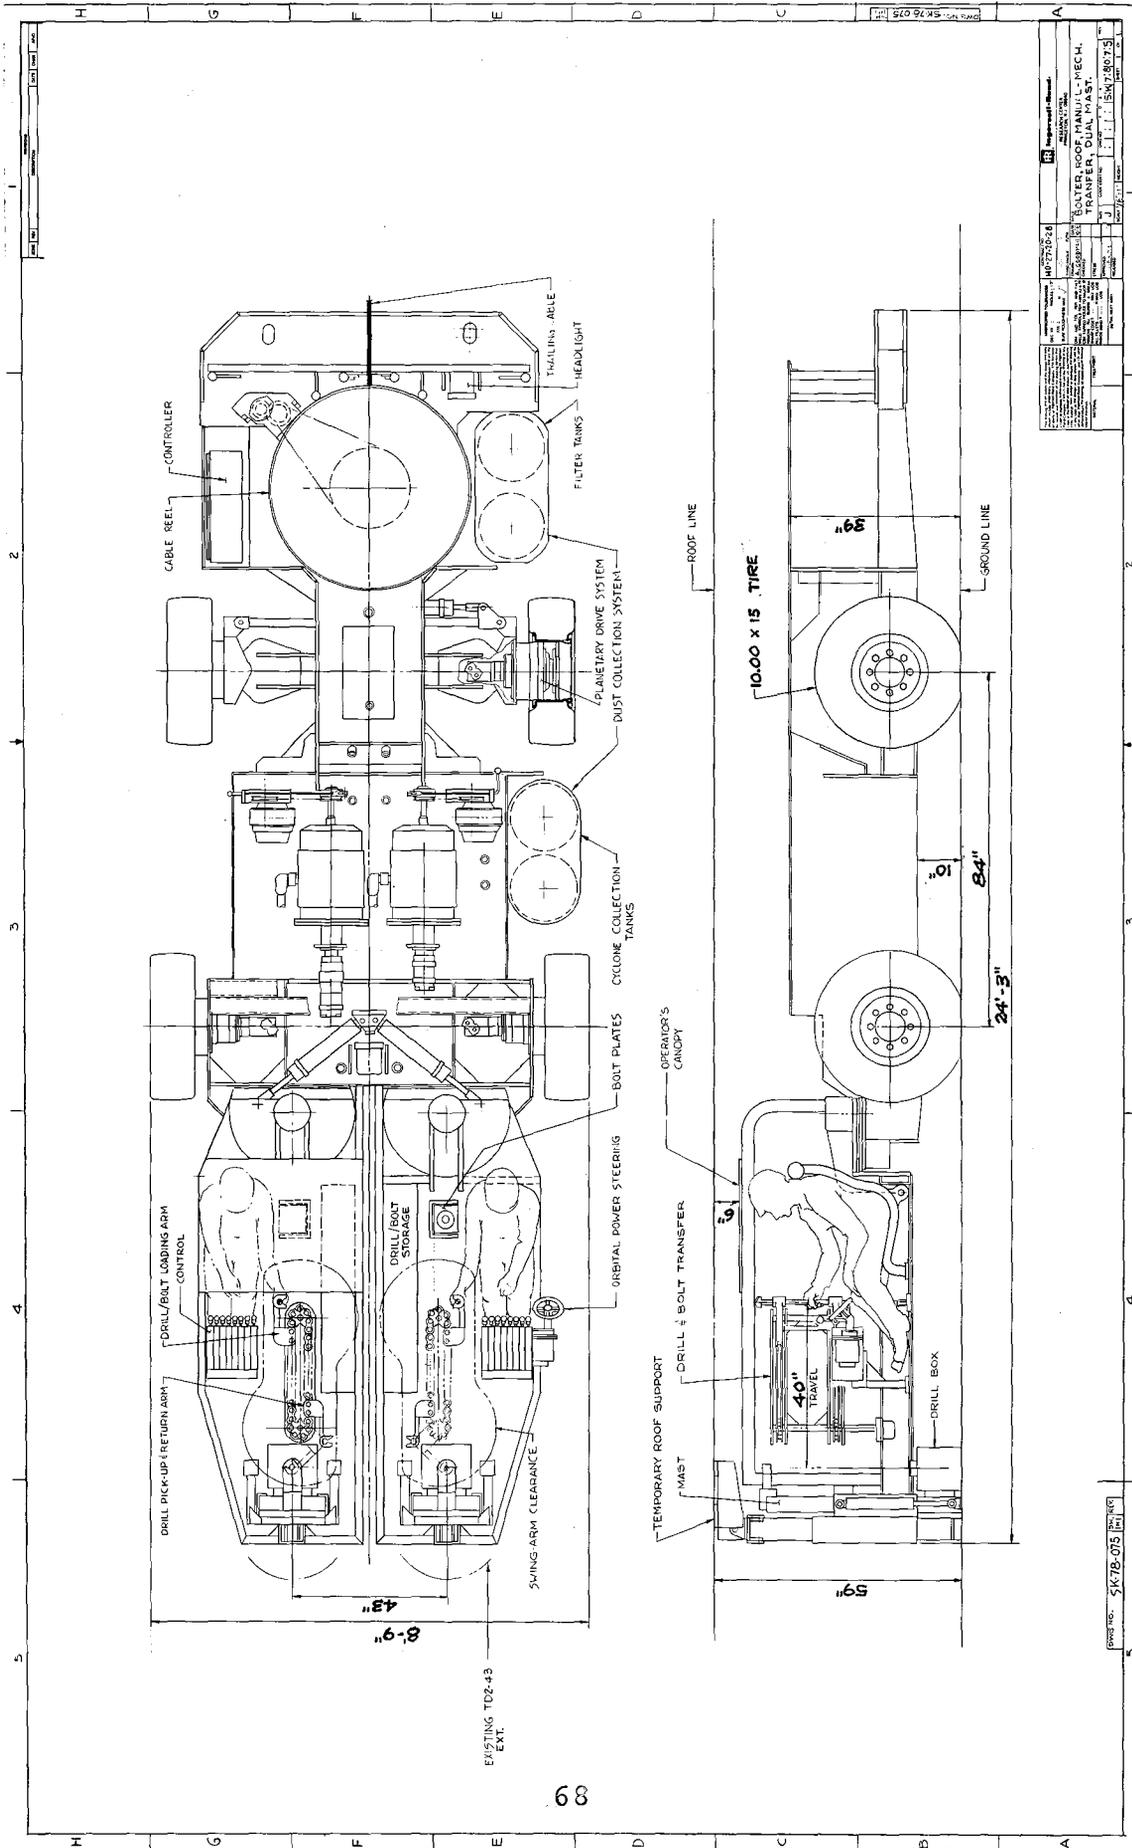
Plan and Elevation Views of the Transfer Bolter - Dual Boom (Standard Chassis)
